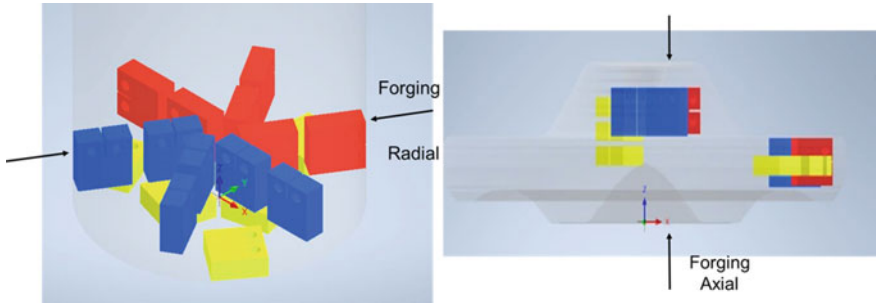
Forging directions of the tested materials, left: radial forging of billet and right: die forging of the final geometry
